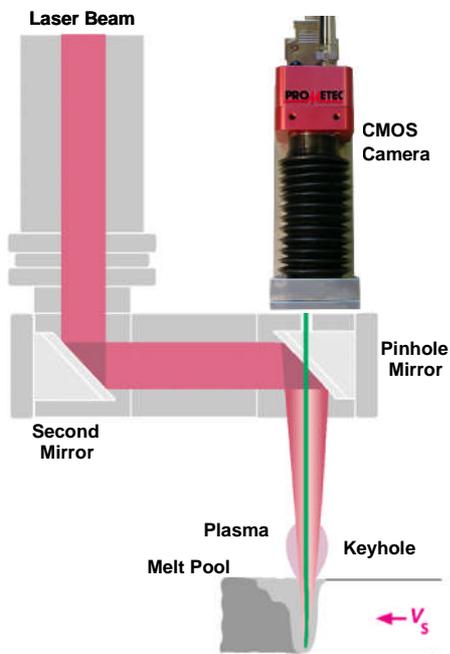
Setup of a Camera based Inline Weld Process Monitoring on a CO₂ laser
